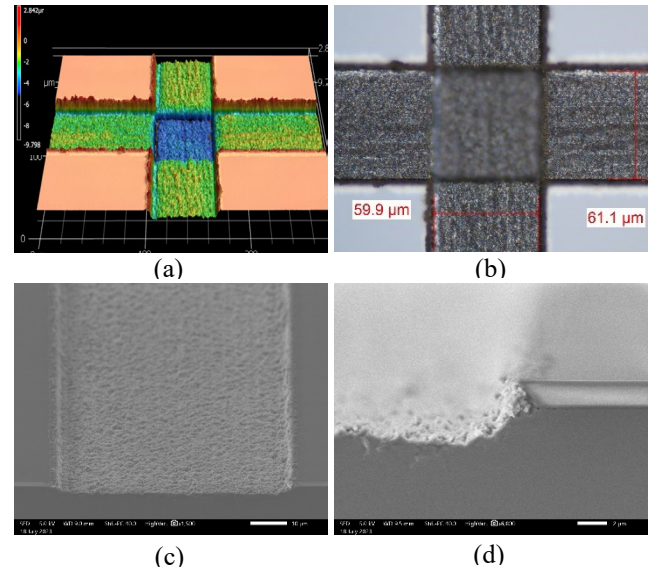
Inspection of UV-USP laser grooved material shows a smooth groove bottom and a maximum of 300 nm burr with (a) confocal imaging and (b) optical microscopy. SEM inspection of a manually cleaved crosscut shows (c) a very flat groove bottom and zoomed in at the edge (d) reveals about 1.5  $\mu\text{m}$  material modification at the top layer interface.
